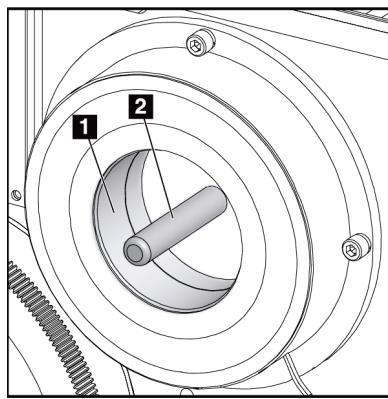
Lubricating the Shaft and Inner Anti-Backlash Gear
